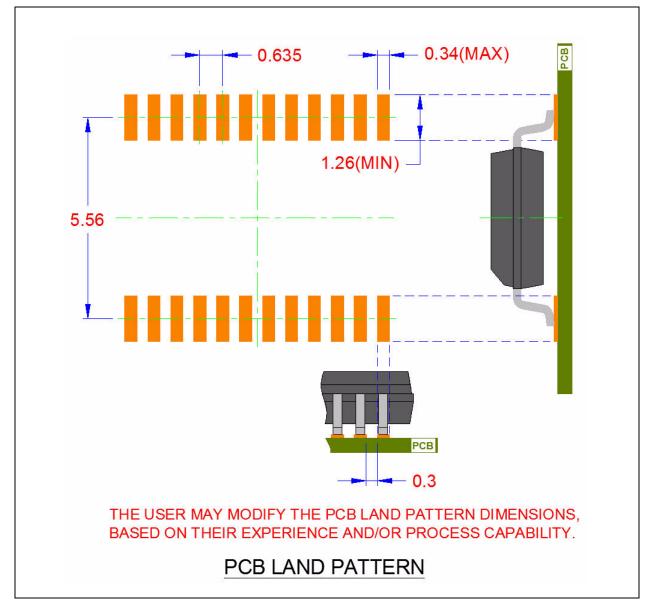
CAP1166 PCB Land Pattern - 24-Pin SSOP
